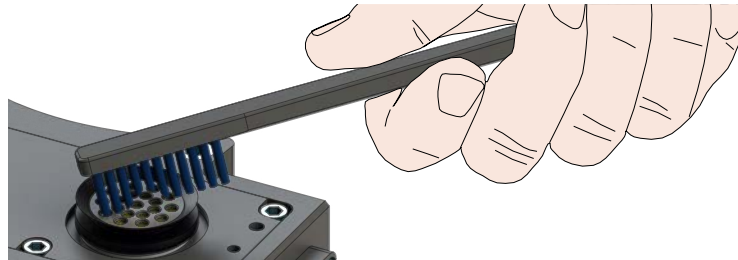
Inspect Master and Tool Pin Blocks
